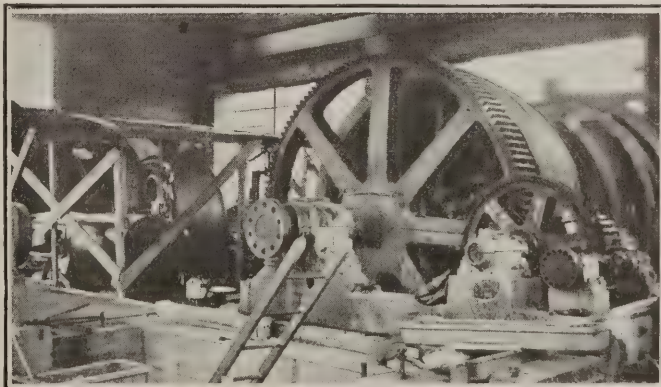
Parts of One of the Largest Single-Motor Mine Hoists Ever Built
